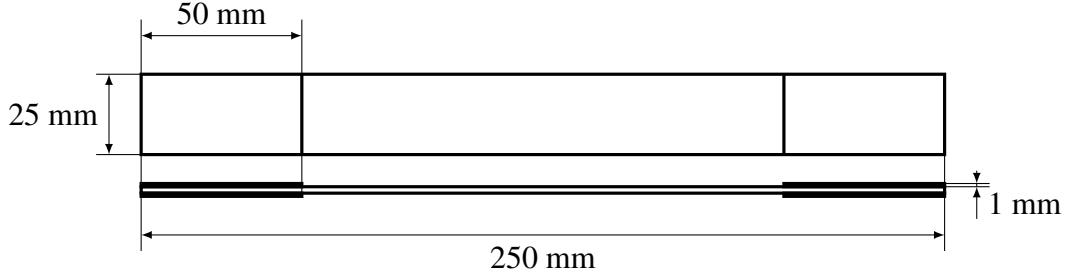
Tensile specimen geometry used for failure identification.
